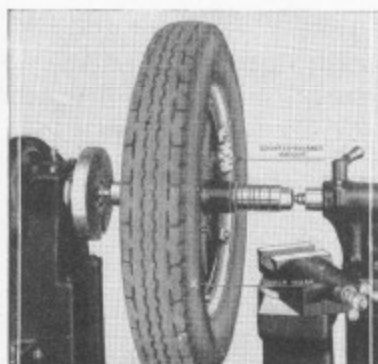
Balancing Wheel and Tire Assembly to Eliminate Shimmy at High Speed.
